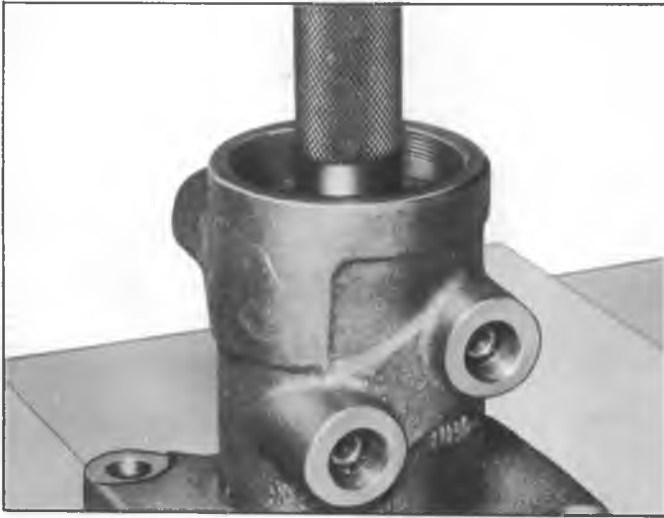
Installing Top Cover Needle Bearing and Seal Using Tool J-8526-1
